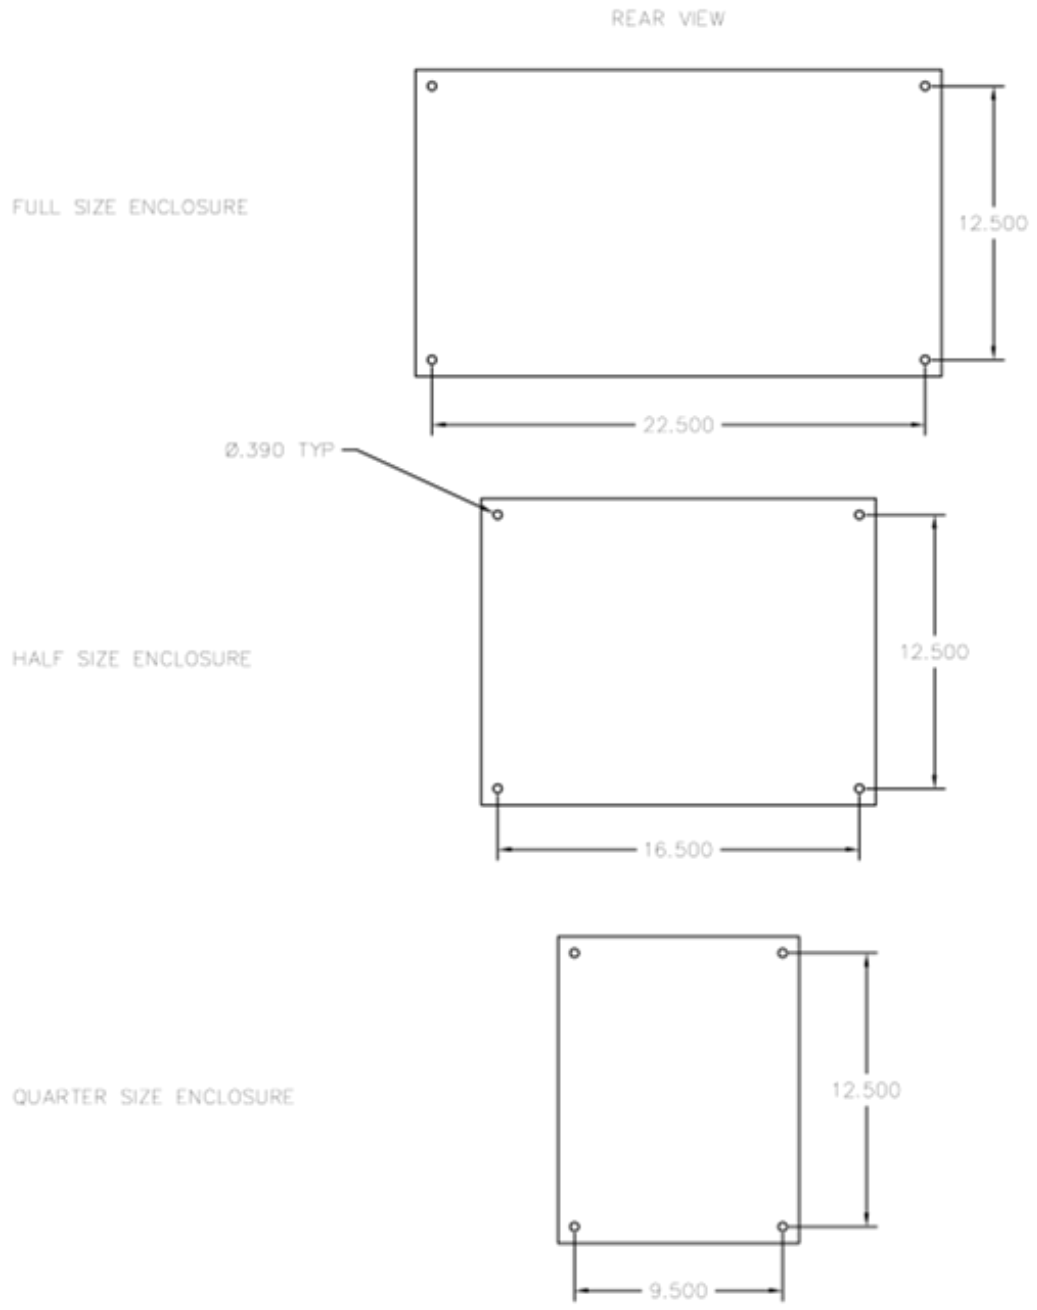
MX2020/WPH ENCLOSURE (REAR VIEW WITH MOUNTING HOLE DIMENSIONS)
